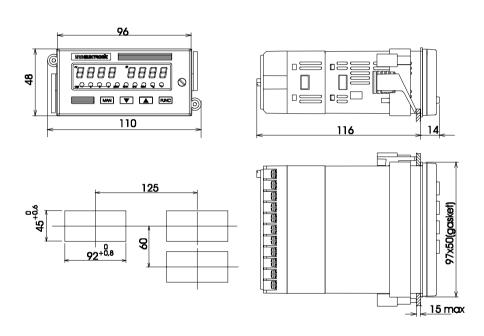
B THS - OUTLINE AND CUT-OUT DIMENSIONS
